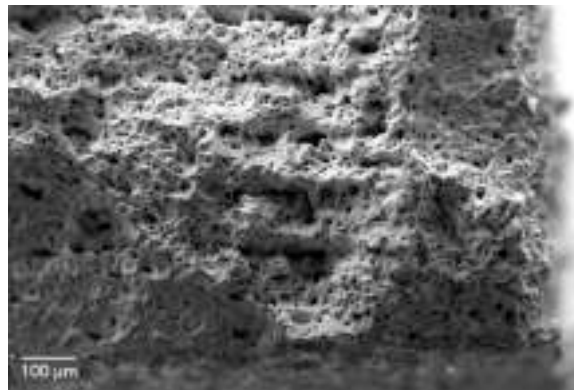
Fracture surface of sample 9.1, indicating fewer smooth, untouched pores.
